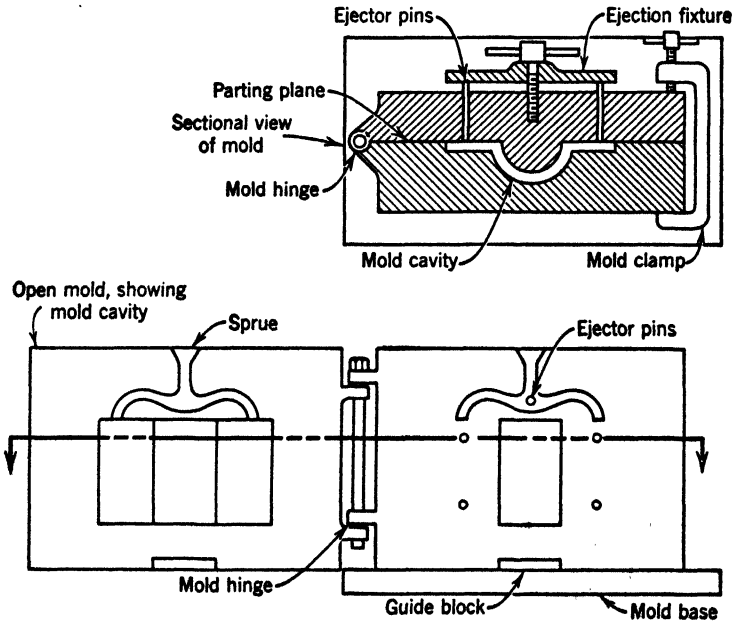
Permanent mold. Top view shows closed mold in section. Front view shows interior of open mold.
